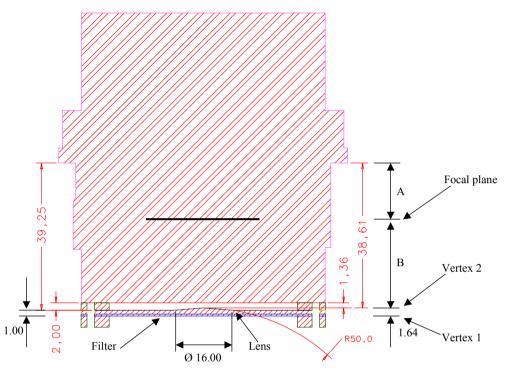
Dimensions of spectrometer lens – filter – detector assembly.
